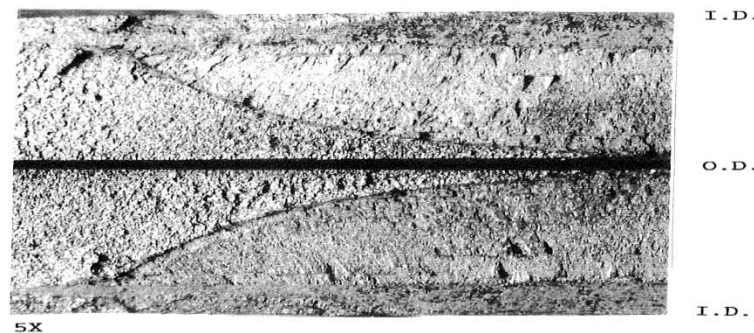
Close-up of Fracture Surface Showing Ratchet Marks and Beach Marks
